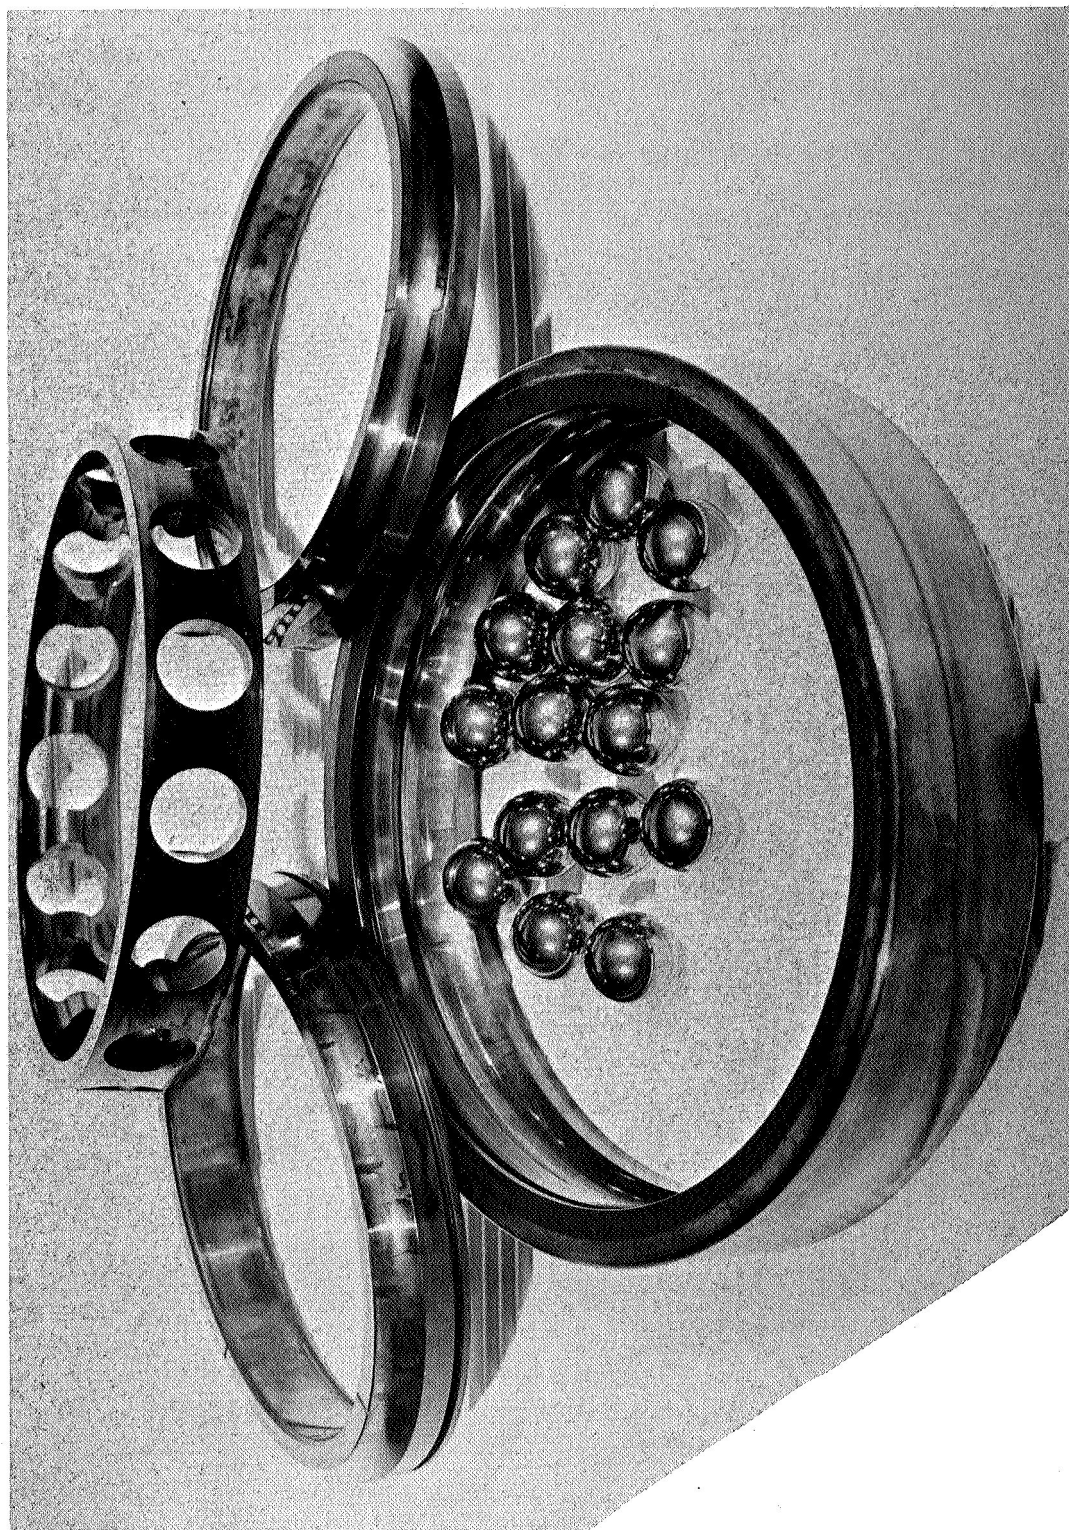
OVERALL VIEW OF BEARING S/N 13 AFTER 500 HOURS
